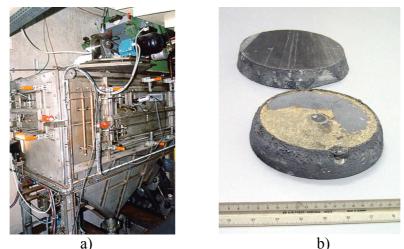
a) Partial view of the Spray Forming Plant at CCTM / IPEN – São Paulo / Brazil. b) AA-6082 alloy preform sections after spray forming.
